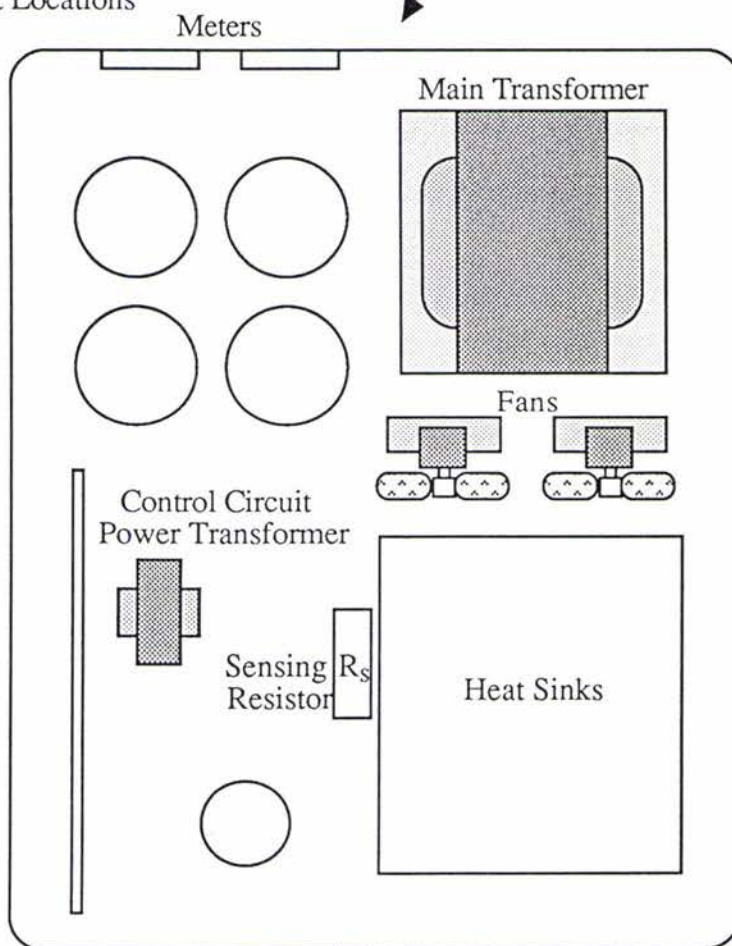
Main Chassis Assembly and Component Locations of KEPCO ATE 75-15M Power Supply
